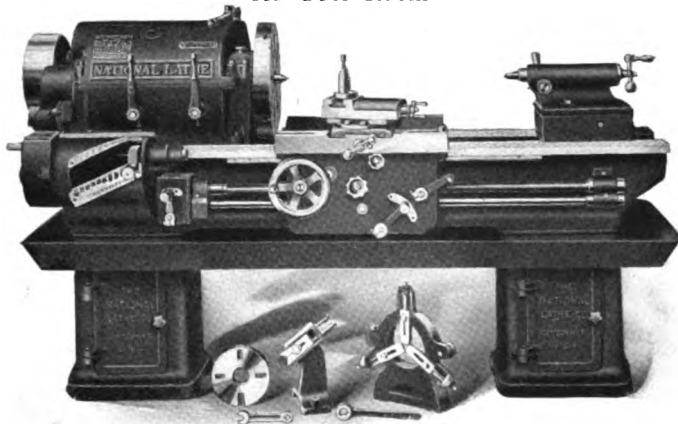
18-Inch Belt Driven Geared Head Lathe
